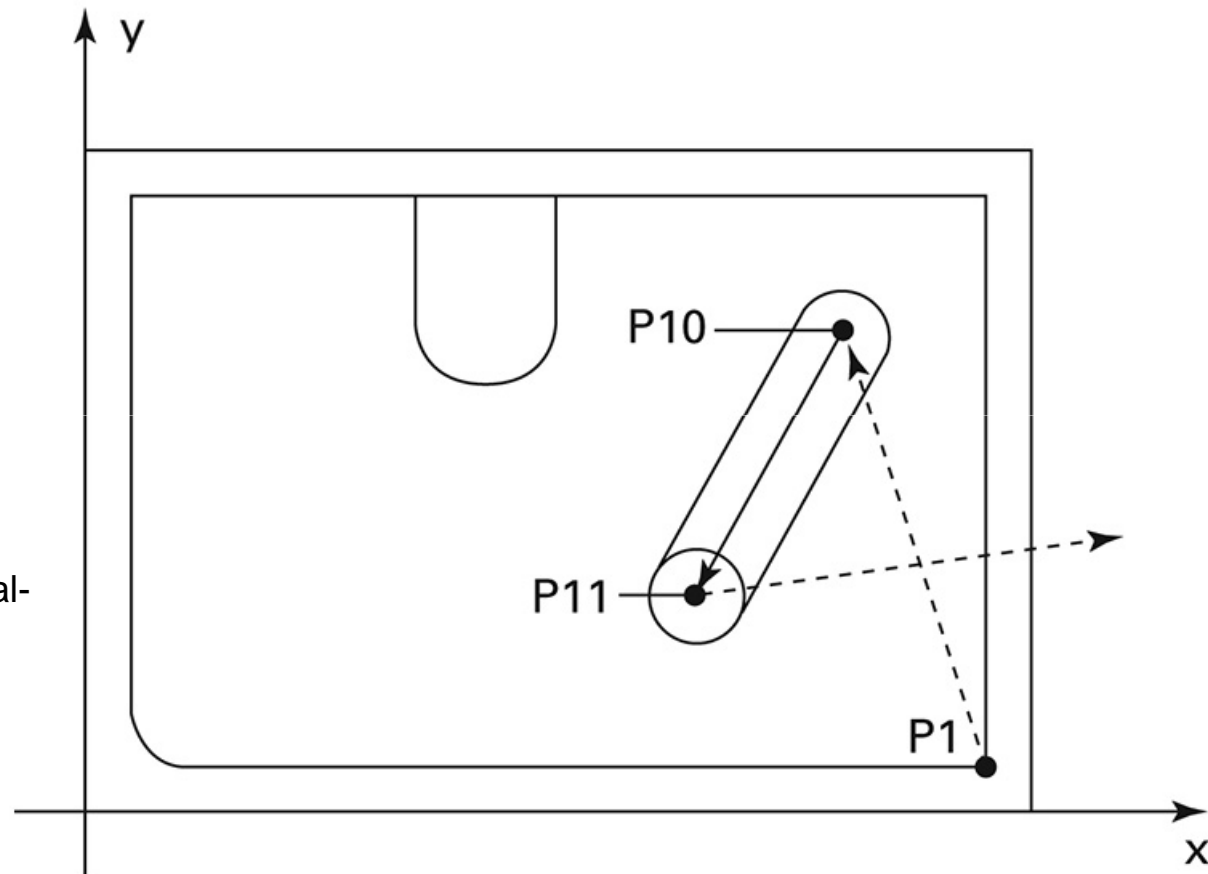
Example of programming a part in a vertical-spindle NC machine.
